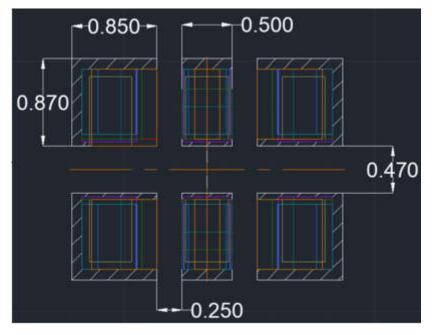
6-Pin, 2.5-mm × 2.0-mm DLF Universal Land Pattern Overlaid With 11 Device Footprints
